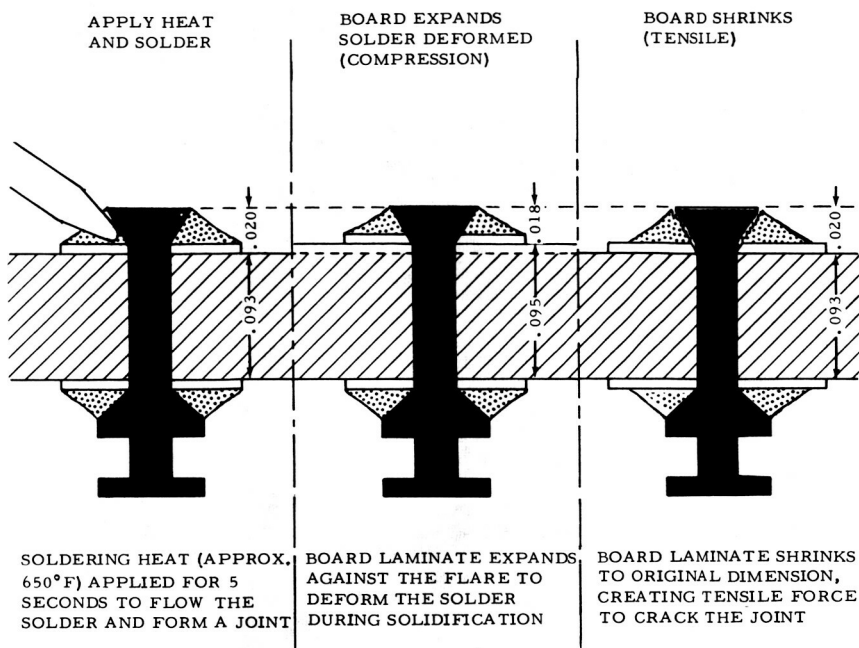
Mechanism of terminal solder joint cracking.
